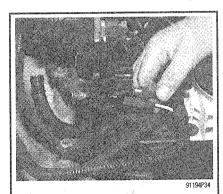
remove the vacuum hoses from the EVR solenoid
